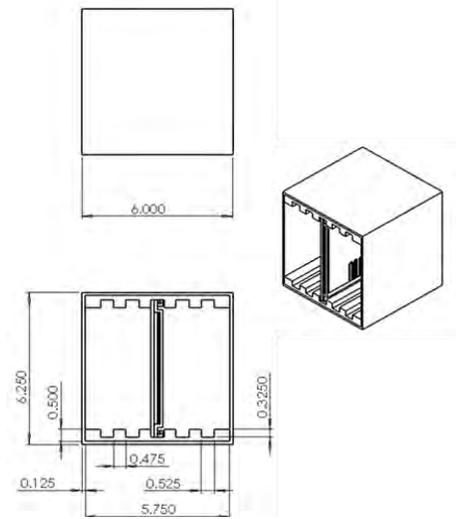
Geometric details of the modular power electronics cooling system (dimensions in inches)
